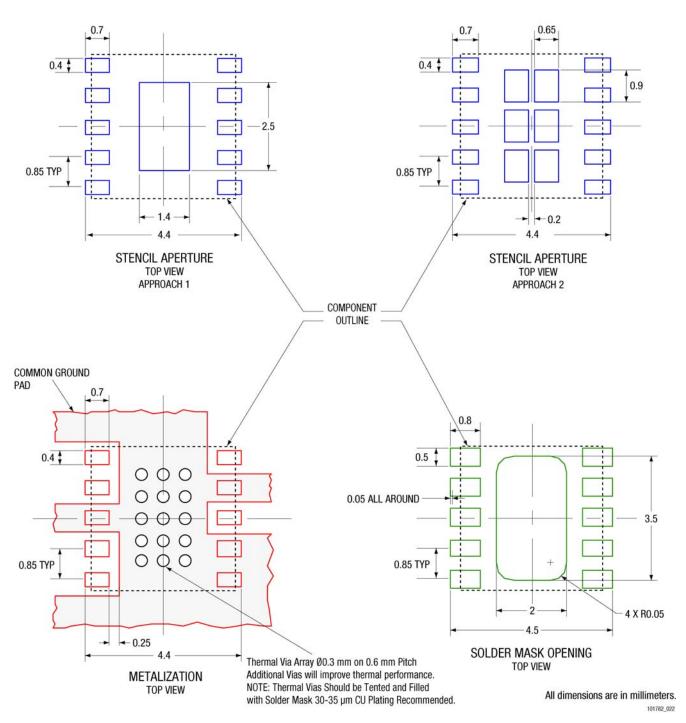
Phone PCB Layout for 4 x 4 mm Package –CX77105
